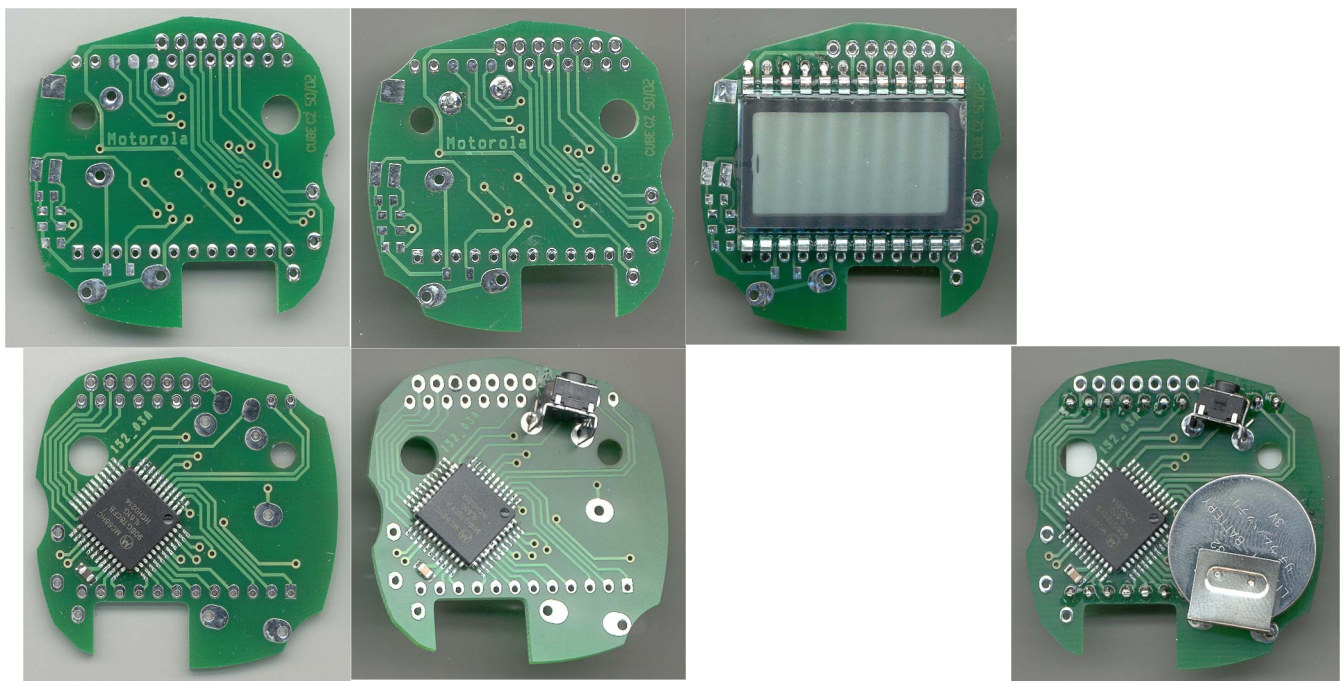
PCB During Low Volume Manufacturing (Top and Bottom View)
